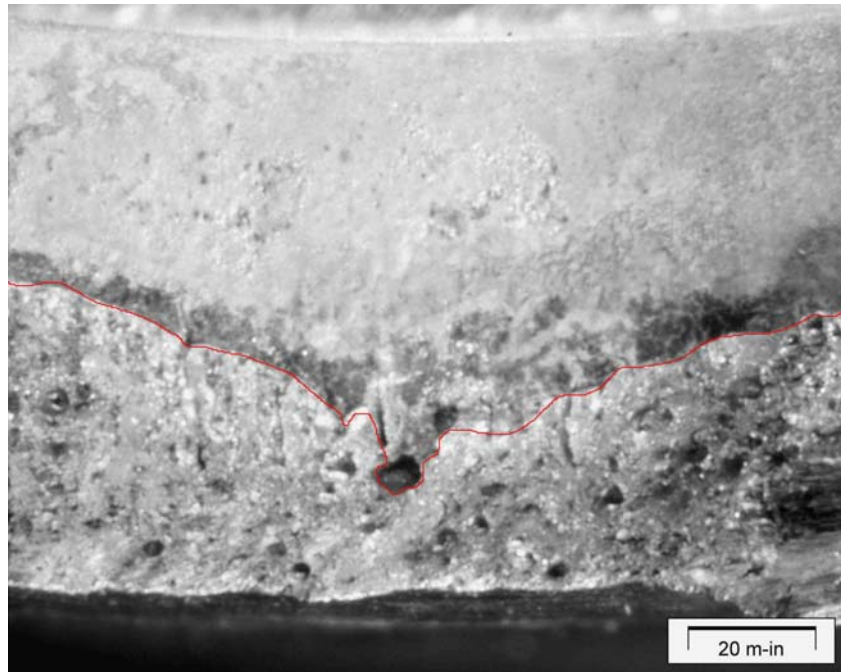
Elbow side fracture half depicting failure origin from cracks and a gas void at the root of the weld, from middle of figure 13.
